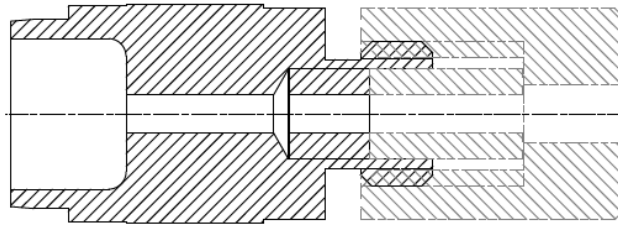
Enlarged representation of a custom Conax fitting suitable of thermocouple installation within a fuel rodlet. The left end contains a weld joint to mate with the cladding tube.
